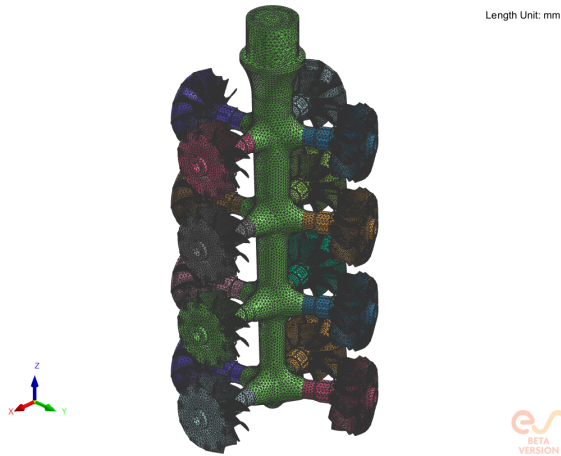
Meshed investment casting tree geometry, sprue and wheel castings
